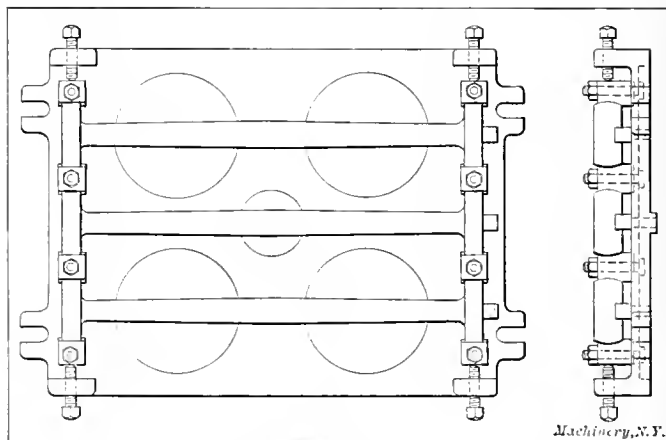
Design of Fixture for Connecting-rods, which proved Objectionable
